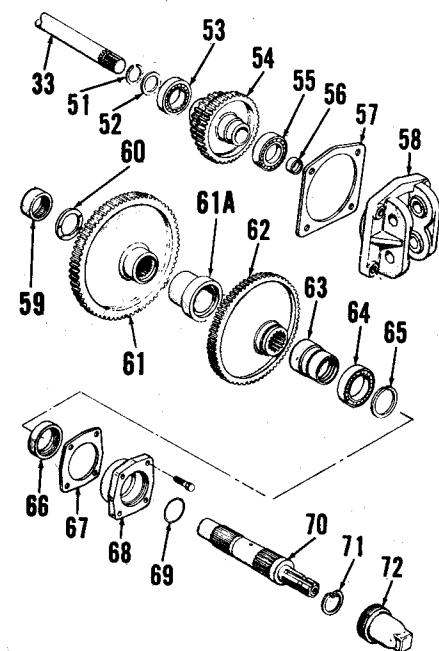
Exploded view showing pto reduction gears, clutch output shaft and pto output shaft. Refer to Fig. 193 for view of both the 540 and 1000 rpm output shafts used on dual speed models. On 1000 rpm models only, drive gear (54) is a single gear and spacer (61A) is used in place of 540 rpm driven gear (61).
